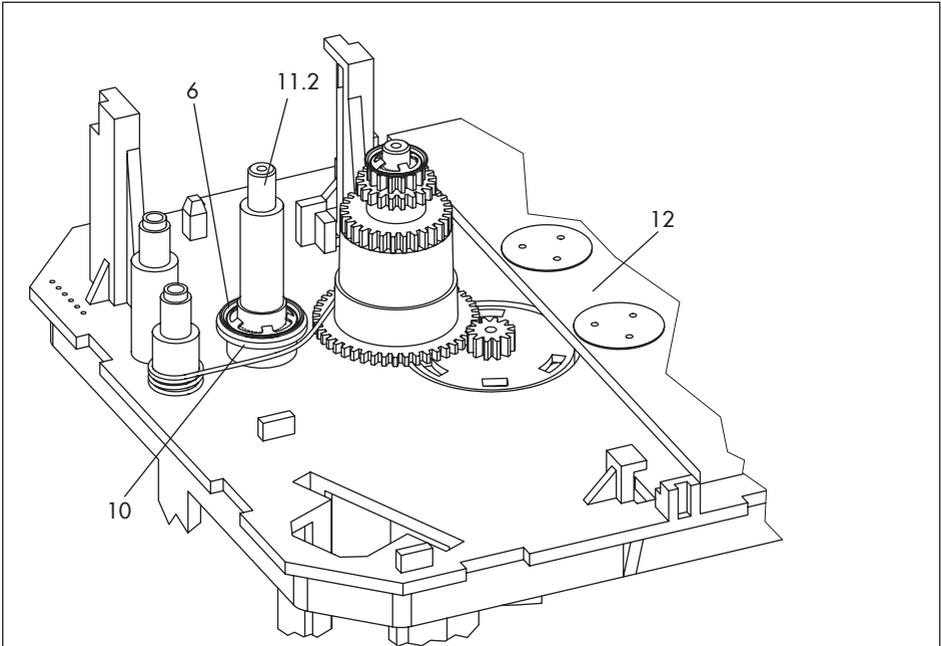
Retrofitting limit contacts (when resistance transmitters are already installed)
